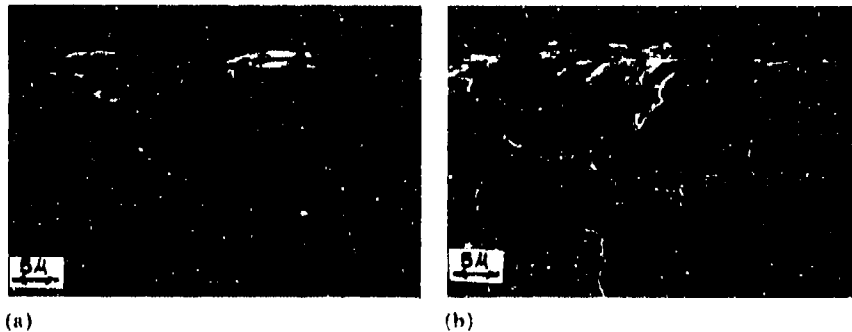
Sections perpendicular to the surface, showing typical subsurface damage of 1018 steel: (a) machined with a chipped tool, 4.8 μm c.l.a.; (b) machined with a sharp tool, 6.0 μm c.l.a.
